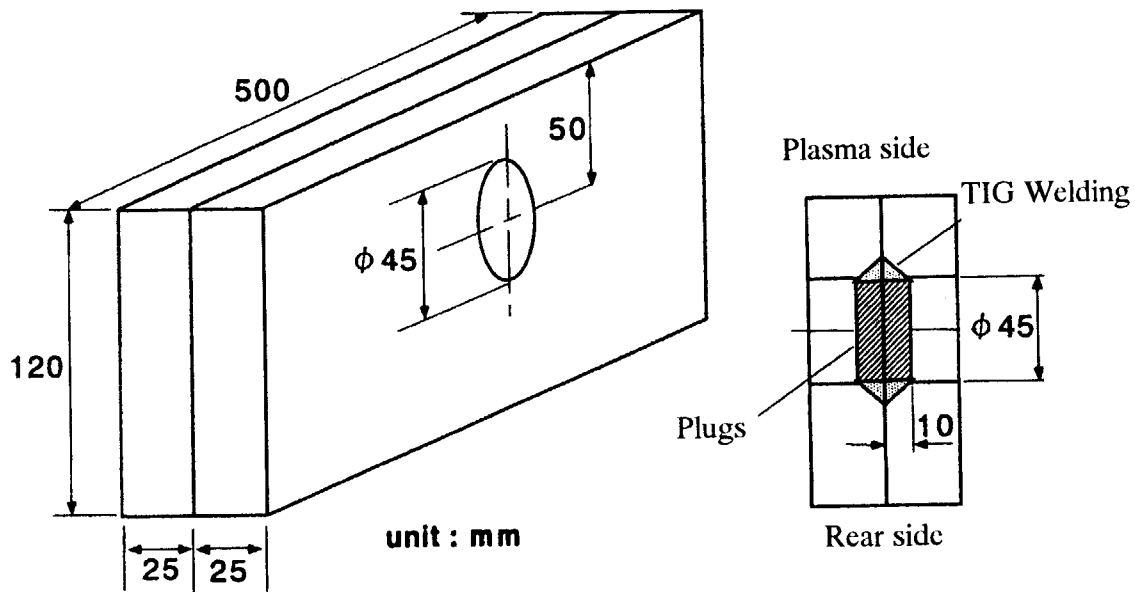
(a) Test piece dimension for testing effect of the EB welding over TIG welding of the toroidal header plugs of 45 mm diameter
